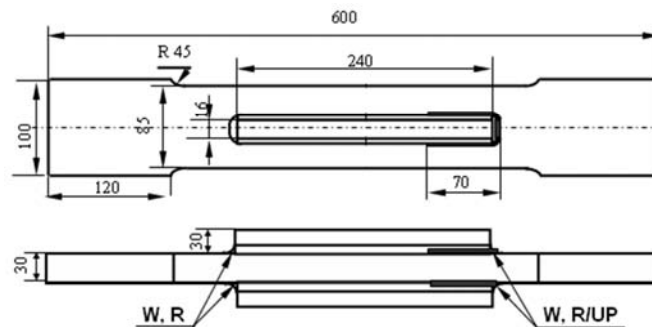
Drawings of welded specimens for fatigue testing at different conditions [15]: W – as-welded condition; R – fatigue crack repair by welding; R/UP – fatigue crack repair by welding and UIT/UP
